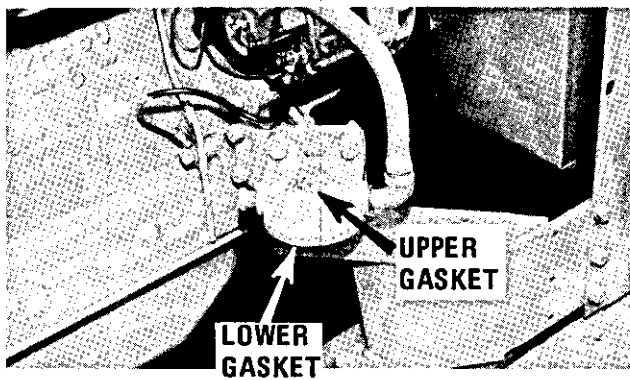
Compressor oil filter (sheet 2 of 2)
